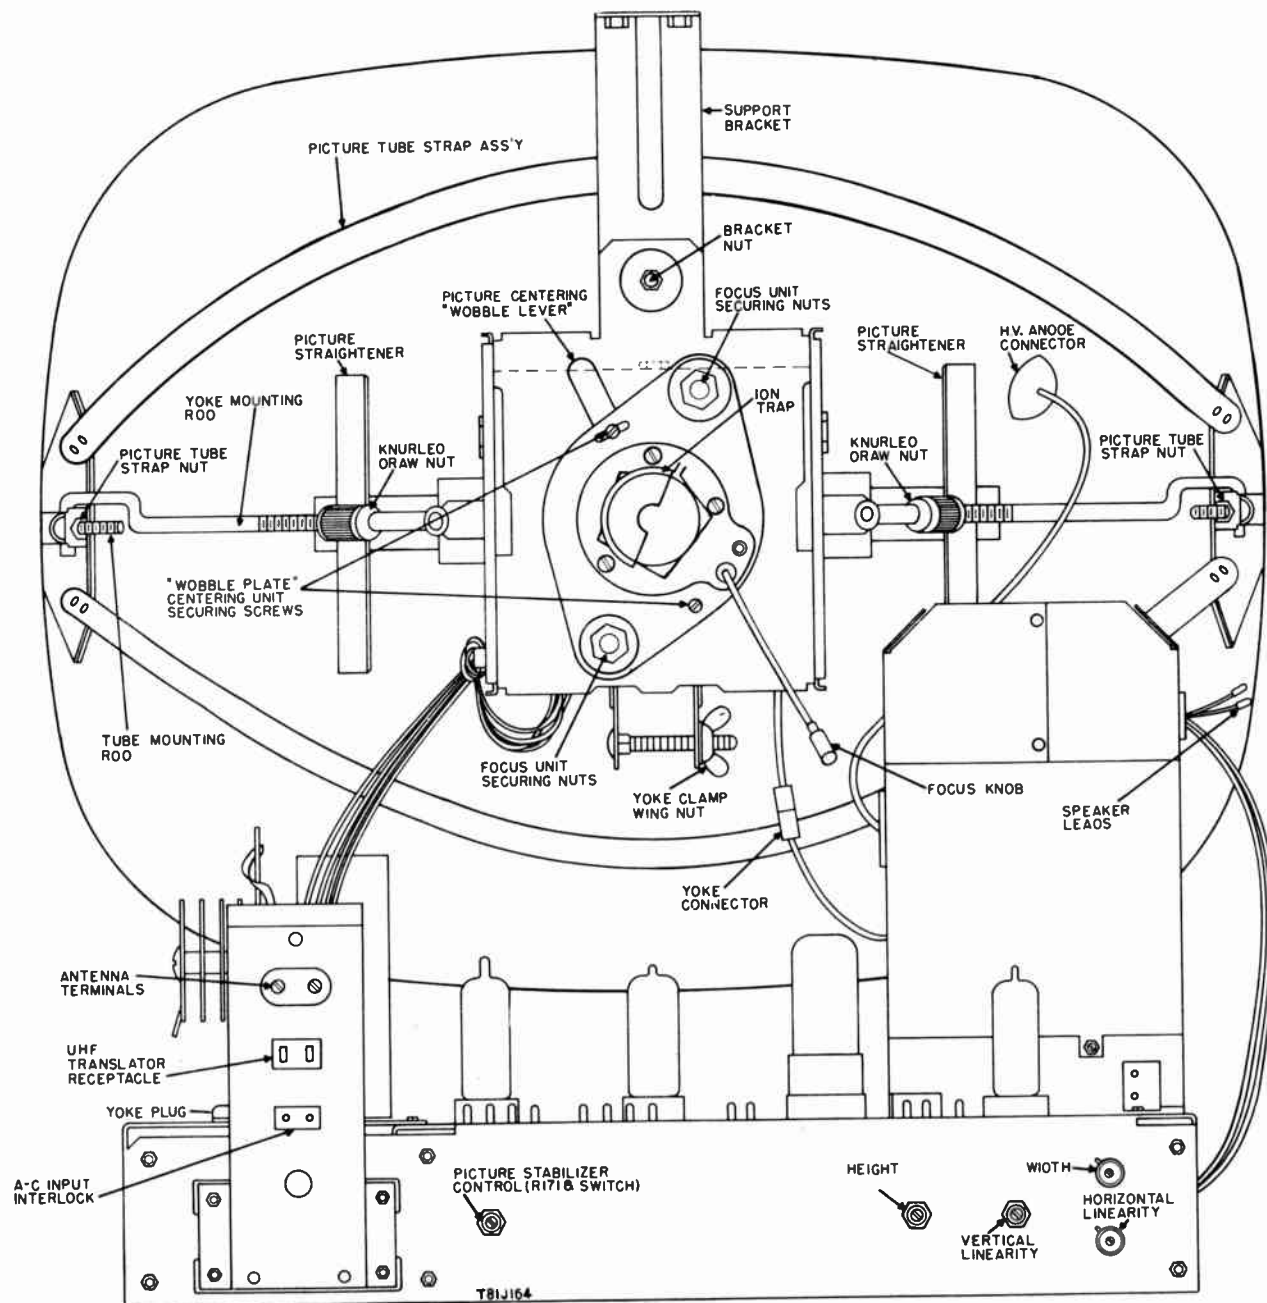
Chassis and 21-inch Picture Tube Assembly, Rear View (Early Production)
